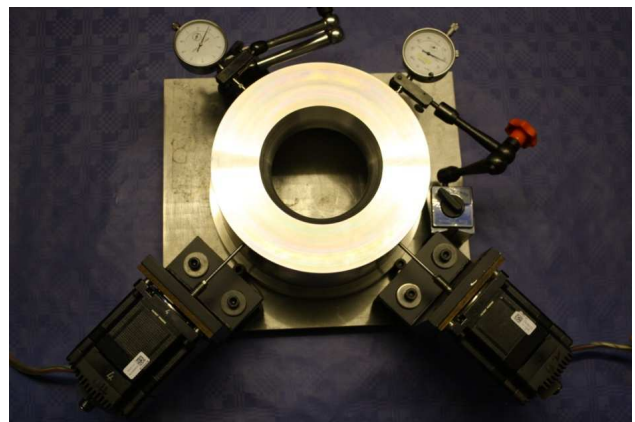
Tilting die retrofitting kit (entrance diameter 7,8 inch) equipped with two stepper drives mounted on a flat ground plate in order to test the achievable tilting angle.
